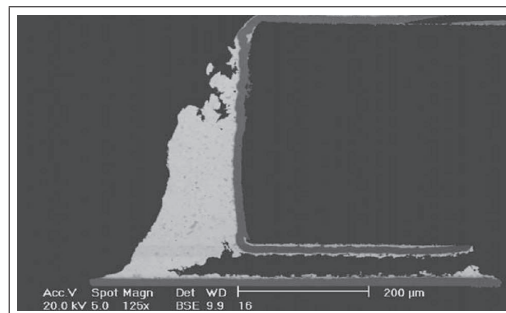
Crack initiation under the component metallization in eutectic SnAgCu solder joint [5].
